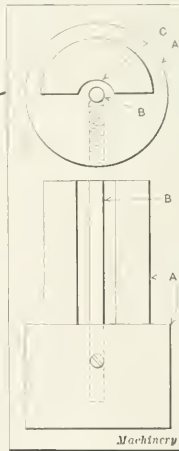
Piercing and Trimming Die used for finishing Ends of Saw Blade Blanks
